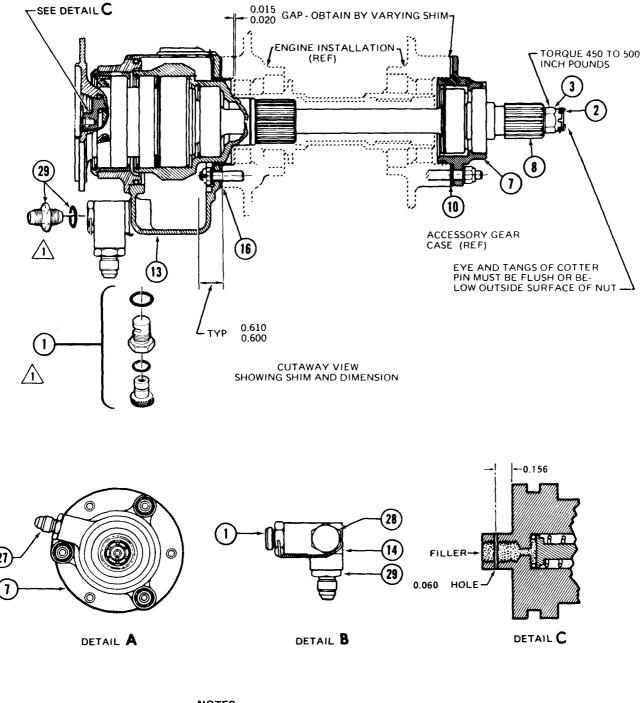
Freewheeling Assembly (Sheet 1 of 2)
